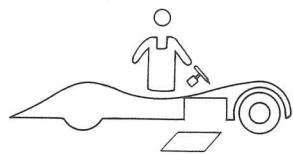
Box in final position. Grind down excess weld and paint.
